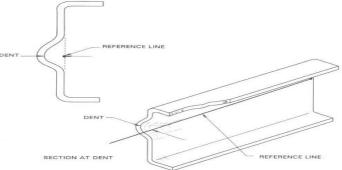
/Measuring damage to center of crossmember web. See Section 4.8.3.
